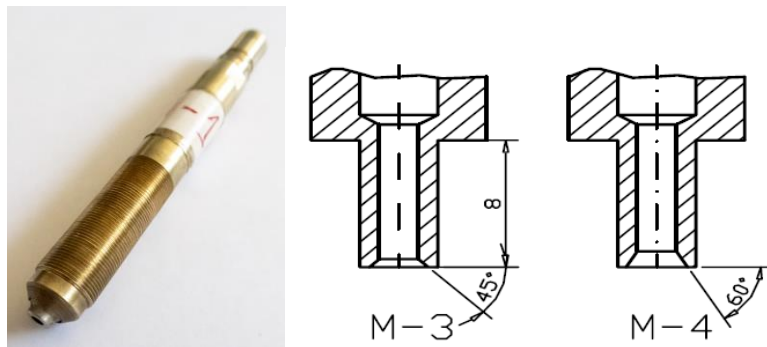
Photography of a measuring nozzle and schematic of M3 and M4 nozzle tip geometry.
